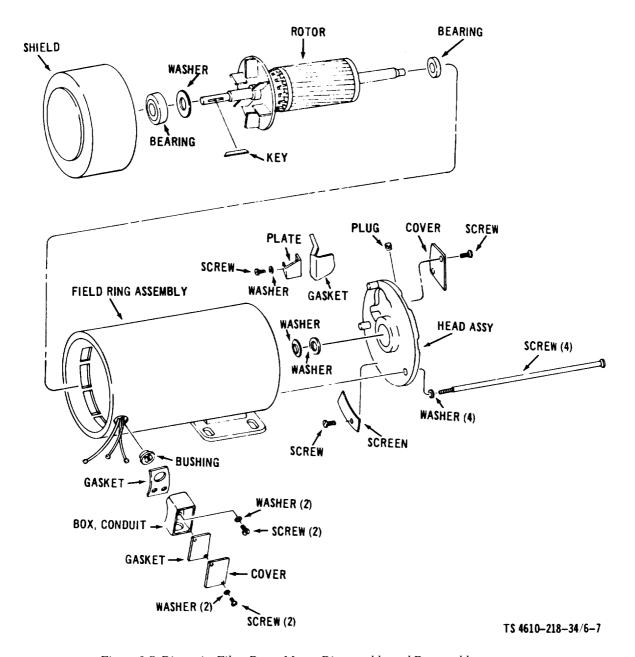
Diatomite Filter Pump Motor, Disassembly and Reassembly
